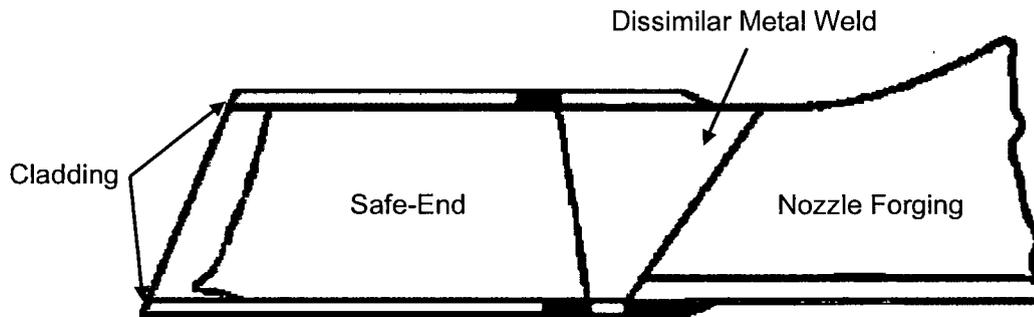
McGuire Unit 1 Reactor Vessel Inlet and Outlet Nozzle DM Weld Configuration
